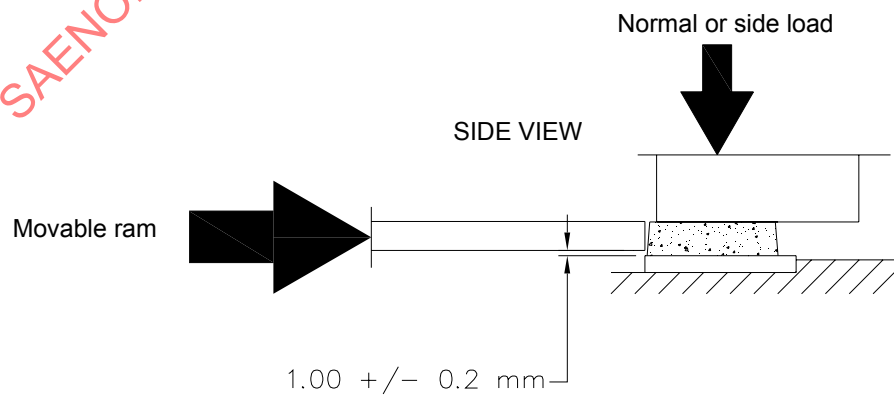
DISC BRAKE SHEAR TEST FIXTURE OFFSET
